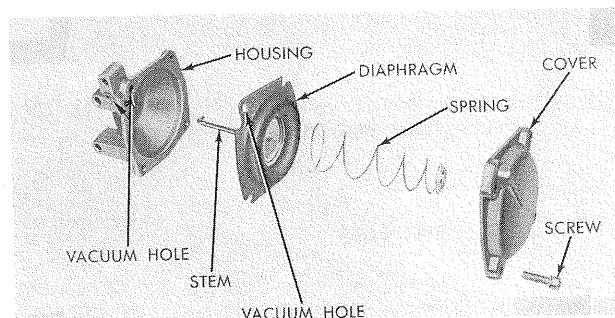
Disassembly or Assembly of Secondary Vacuum Diaphragm
